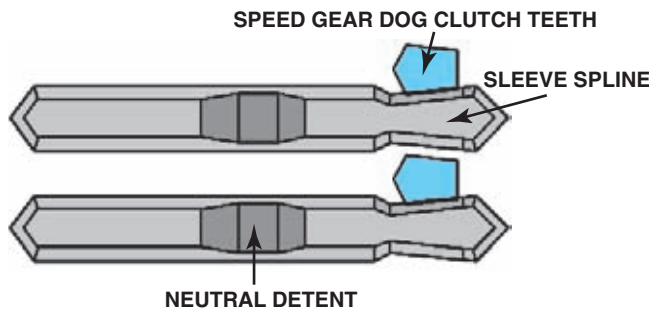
The splines in the sleeve and the dog clutch teeth have a slight back-taper or back-cut to hold them in mesh as the vehicle is driven. (Courtesy of Toyota Motor Sales USA, Inc.)
